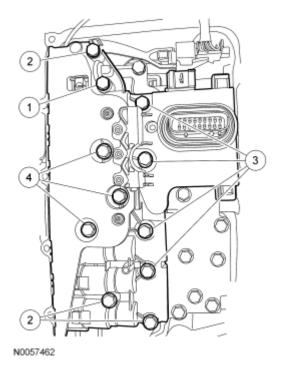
Identifying M6 Bolt Courtesy of FORD MOTOR CO.
